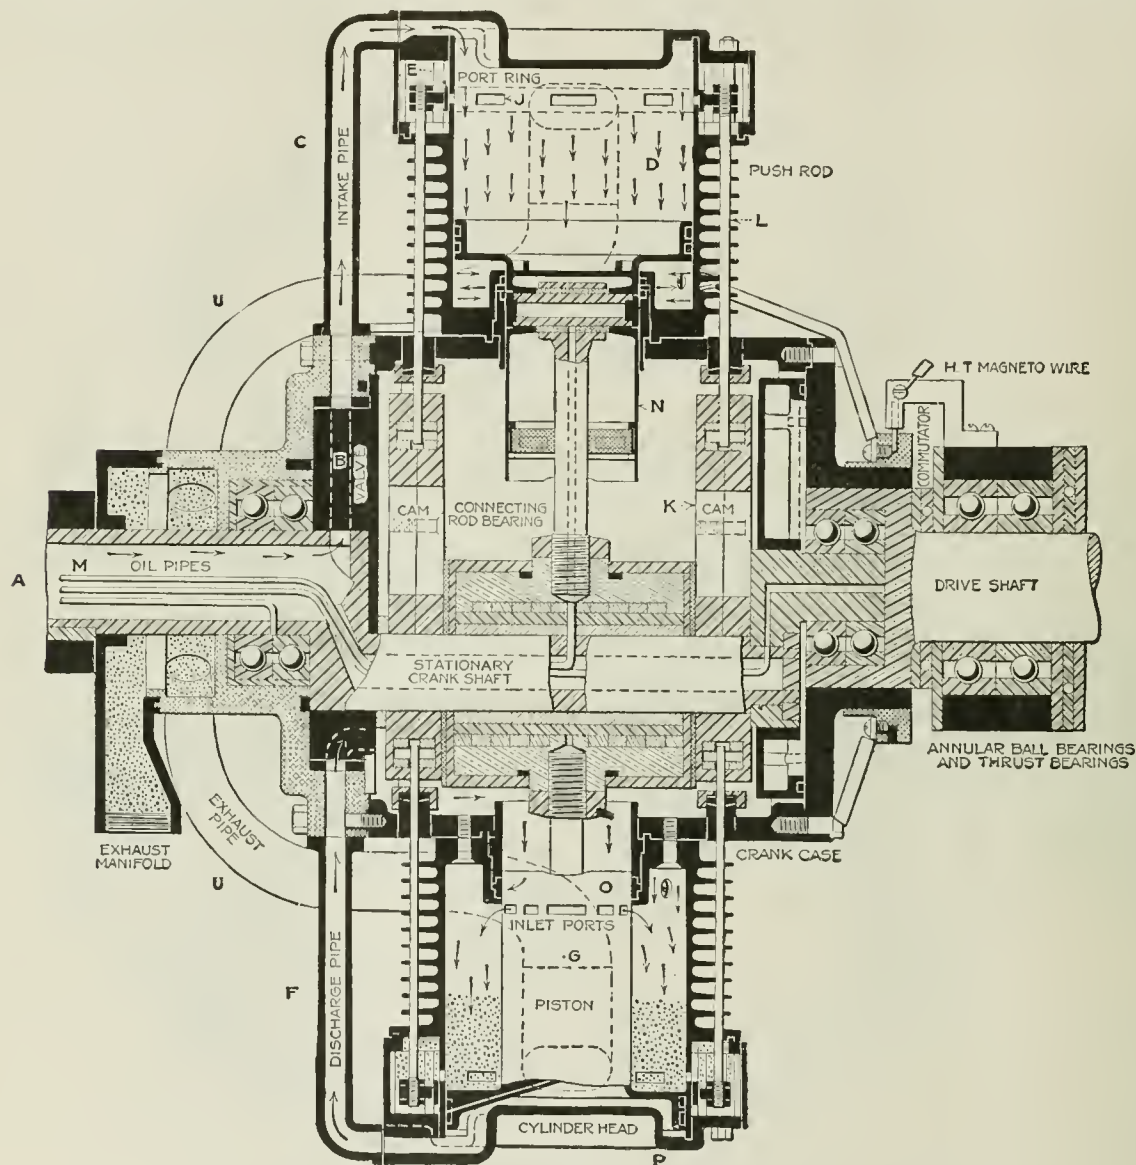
SIDE SECTIONAL VIEW THROUGH THE TWO-CYCLE ROTARY ENGINE
